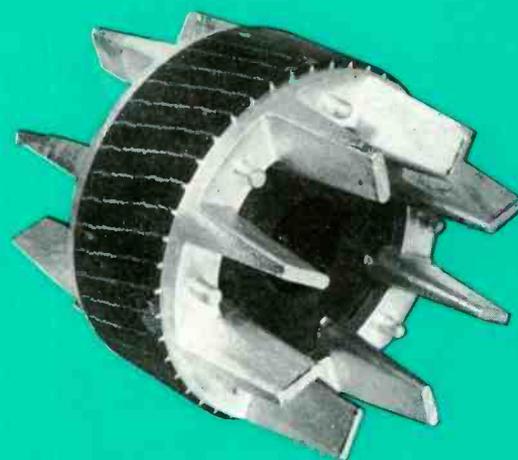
Small die cast (aluminum) rotor assembly, for 1/2-hp motor.
